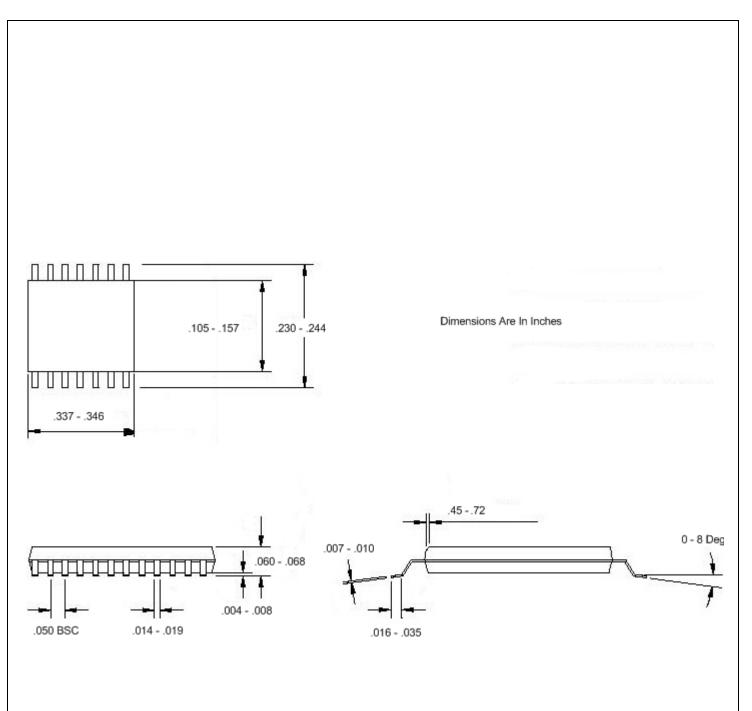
Package Dimensions 14 Lead SOIC Narrow Body - G Package
